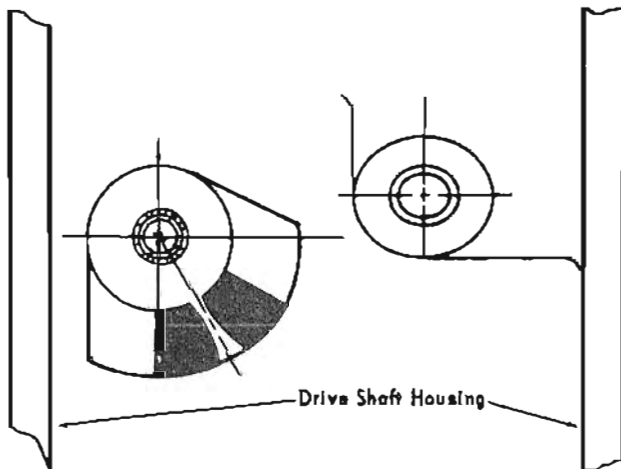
Cam Position - Forward Gear, Right Hand Rotation
